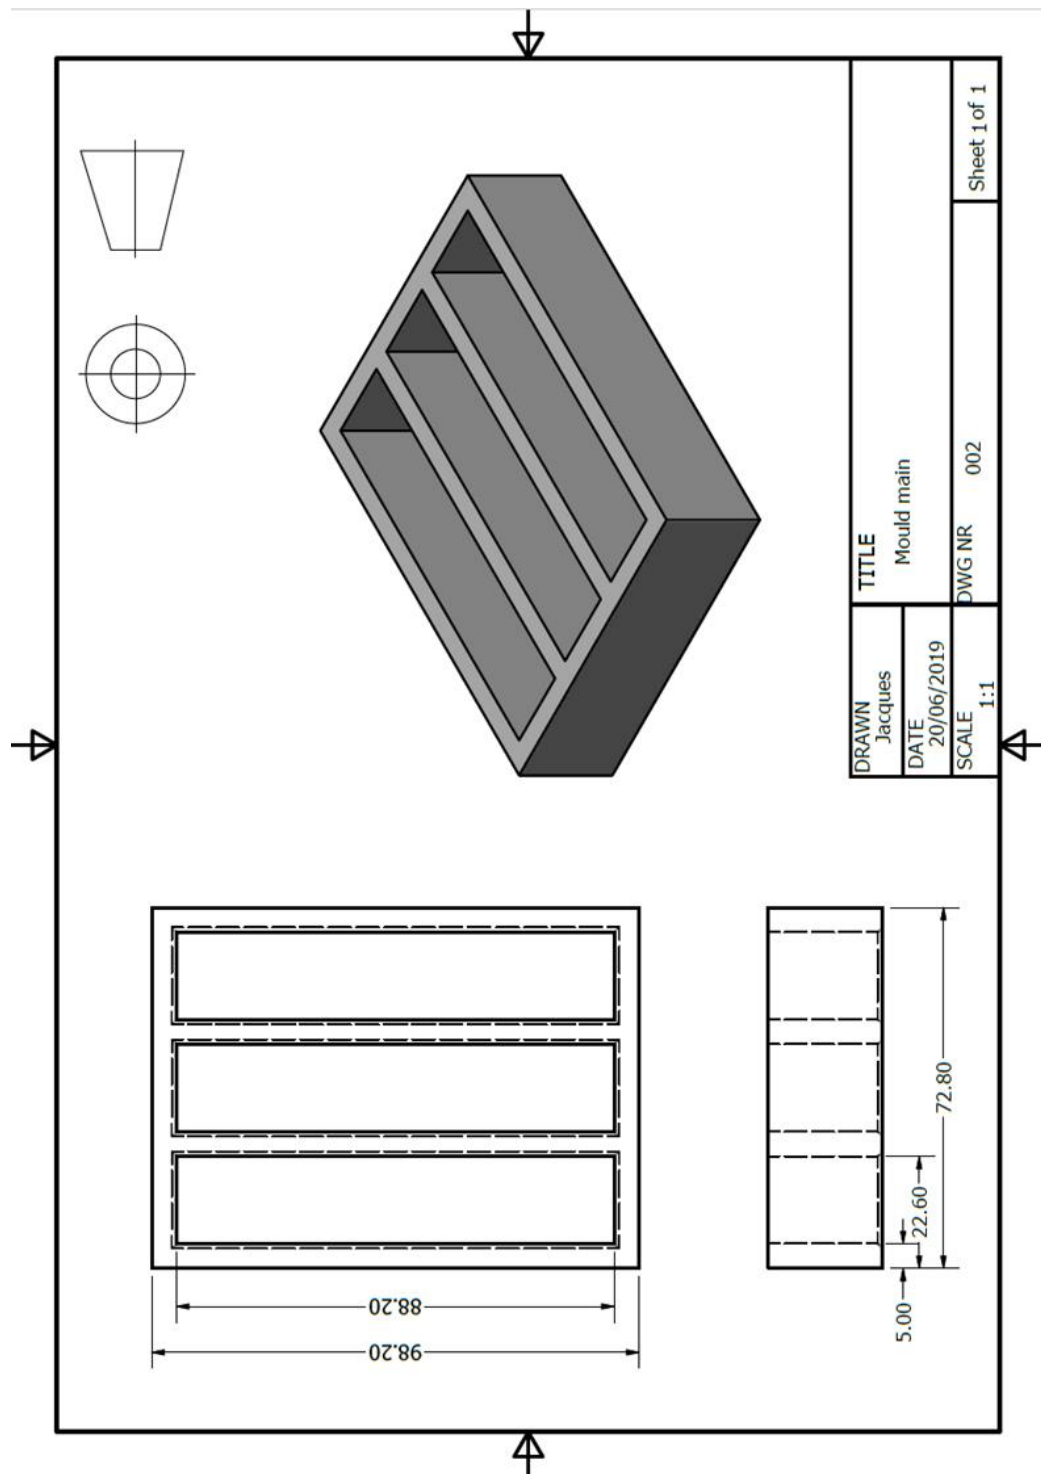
CAD drawing of the bar cavity resin mould for 3D printing
